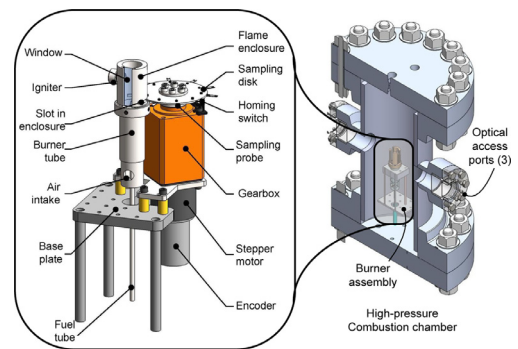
Isometric view of the sampling system and the burner assembly along with a cut view of the high pressure chamber.
